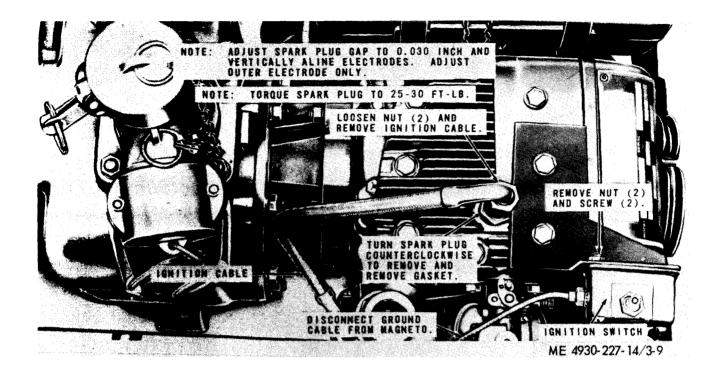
Spark plug, ignition cable, ignition switch, and ground cable, removal and installation.
